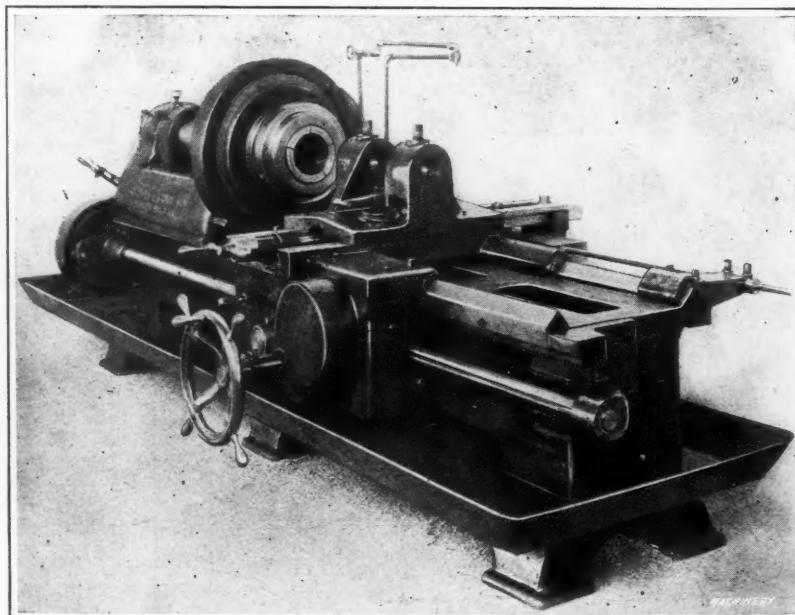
Twenty-five-inch Shell Boring Lathe built by the Gisholt Machine Co. for boring 6-inch Shells
